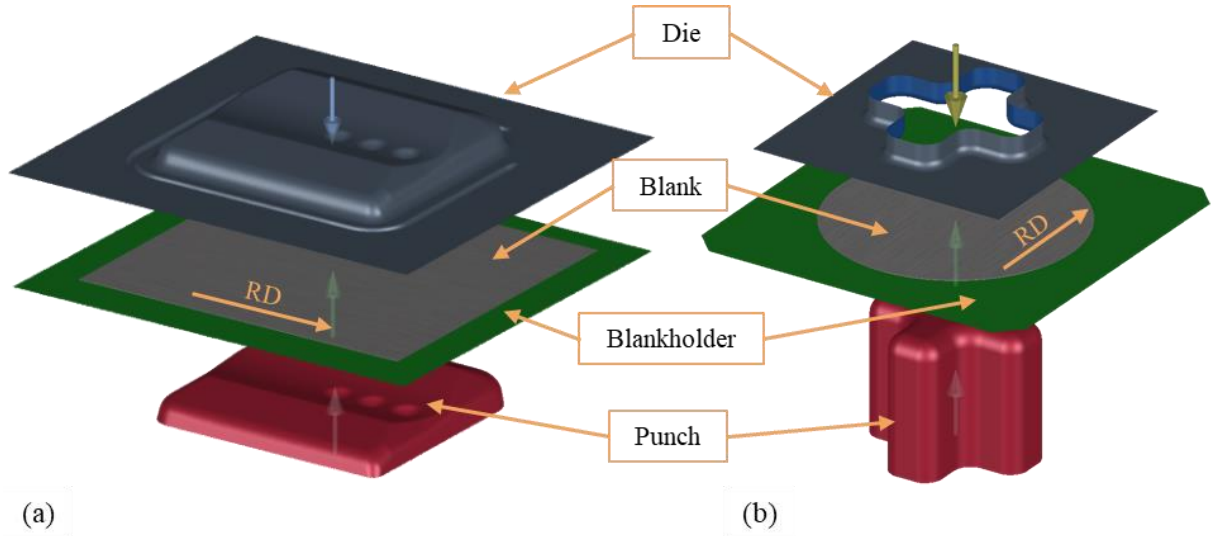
Simulation models of active tool parts for (a) the A-Tool and (b) the CS-Tool
